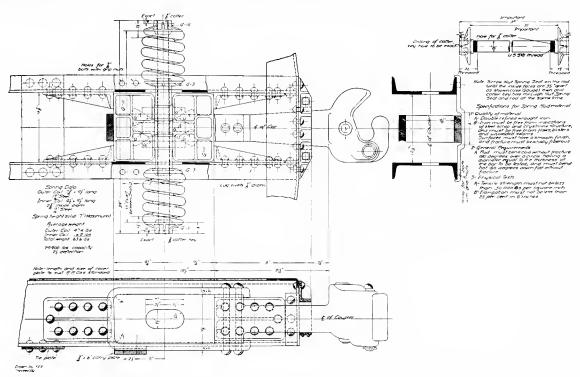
General Design of Application of Cardwell Friction Draft Gear, Type G, Class 11. Union Draft Gear Company.
